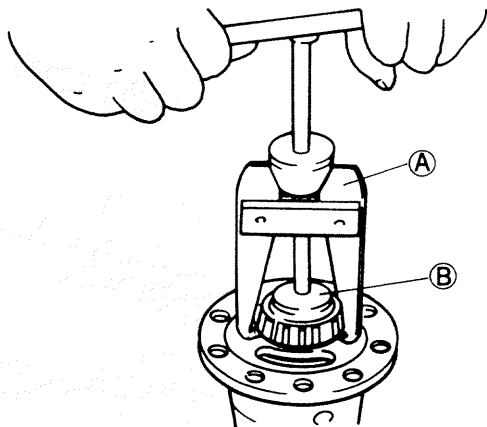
(A) Special tool (Bearing puller 09913-60910)
